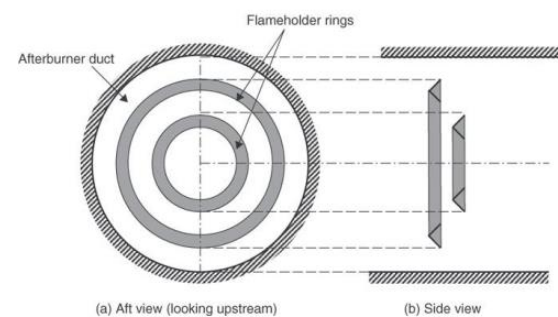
Schematic of a V-Gutter flame keeper [18]
